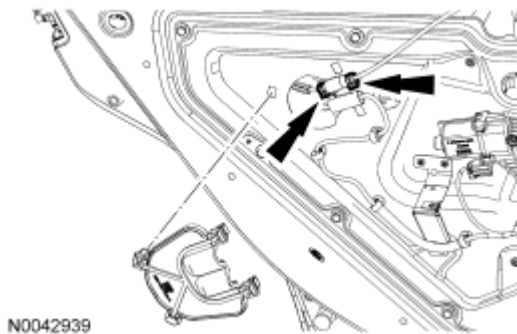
Locating Wiring Harness Cover Plate & Door Latch Cable Retainers
